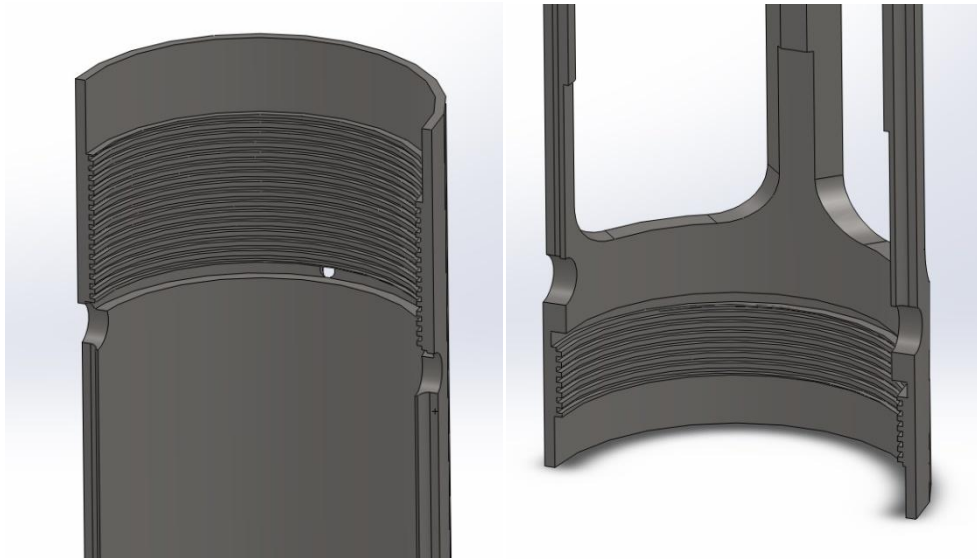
Section view of Economole chassis 3D CAD model, showing: upper hole and groove detail (left), and lower hole detail (right)
